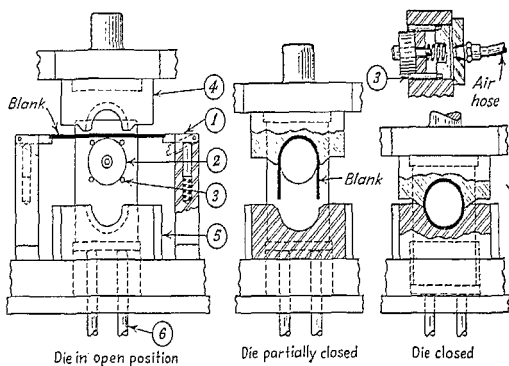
Ring-forming die. (Toledo Pressed Steel Co.)
